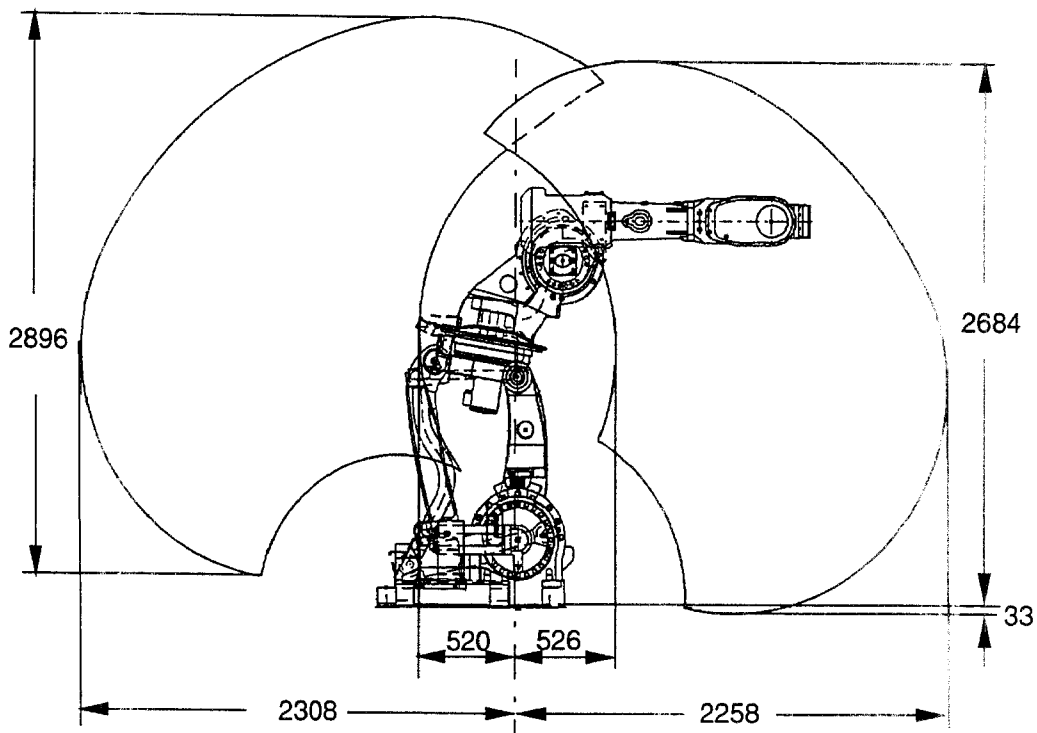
Working space of the IRB 6400C Turn-Back Right side and Left side version (dimensions in mm).
